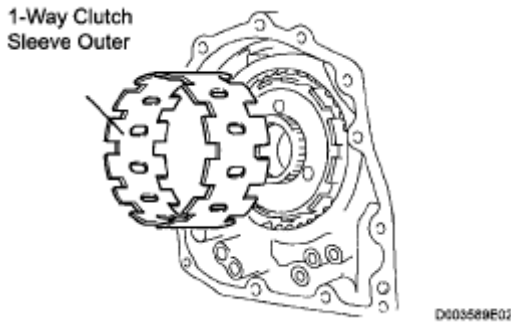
Identifying 1-Way Clutch Sleeve Outer
